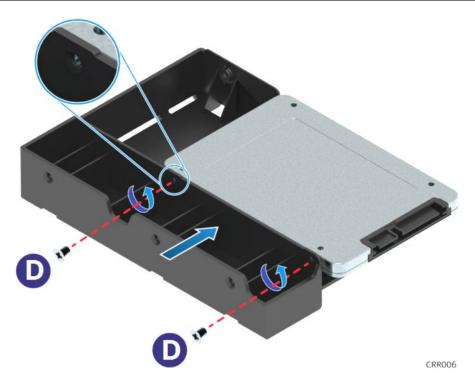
3.5" Drive Carrier to 2.5" SSD Bracket - Mount SSD to Bracket
